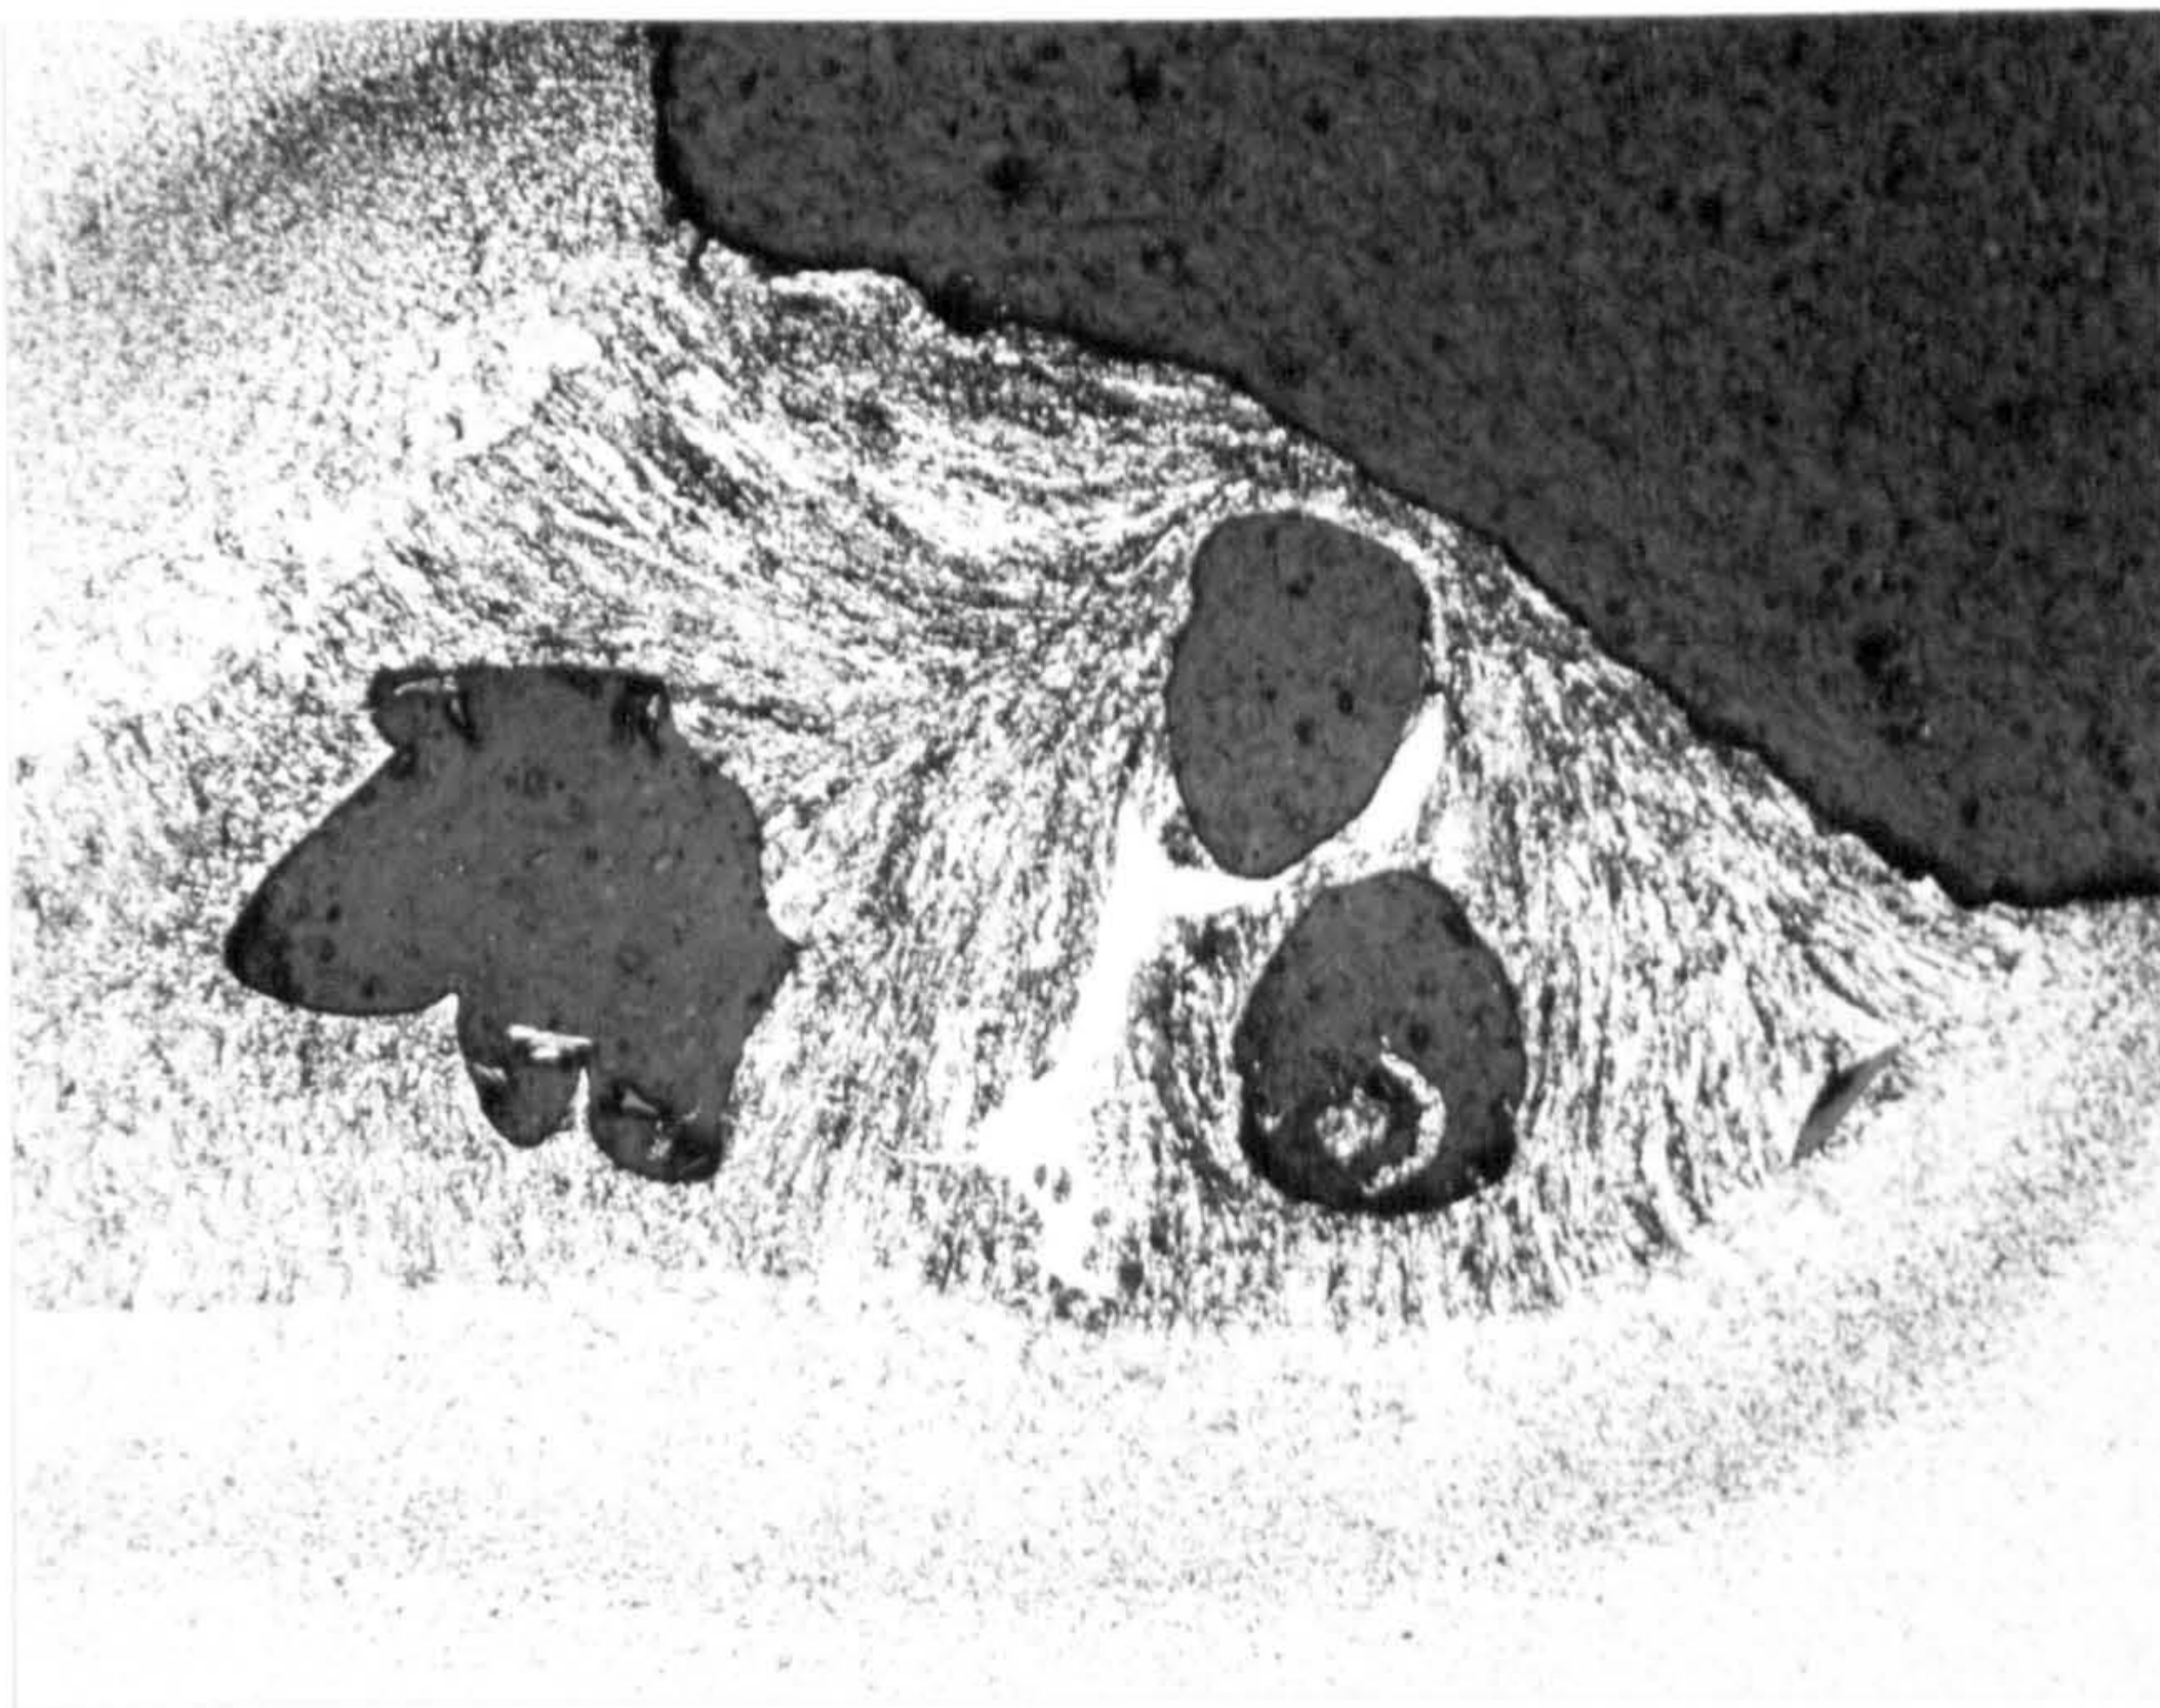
Porous emergent bead in a 6mm skid weld (x20).
